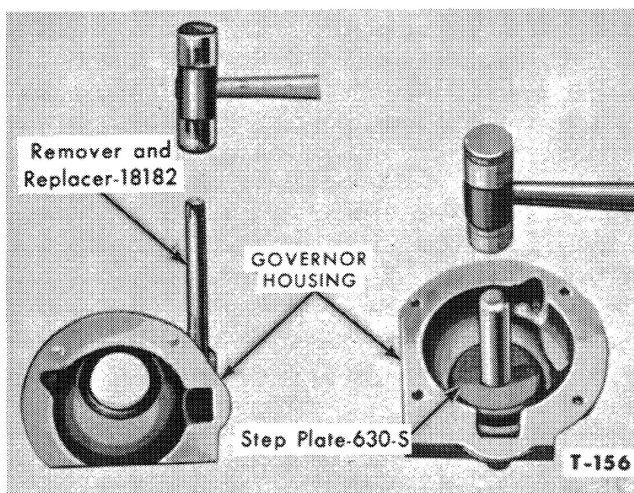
Removing or Installing Needle Bearings and Installing Crankshaft Oil Seal
